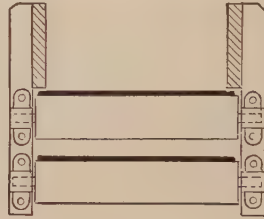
Clay Conveyor Belt Supported on Rollers, 1870.
